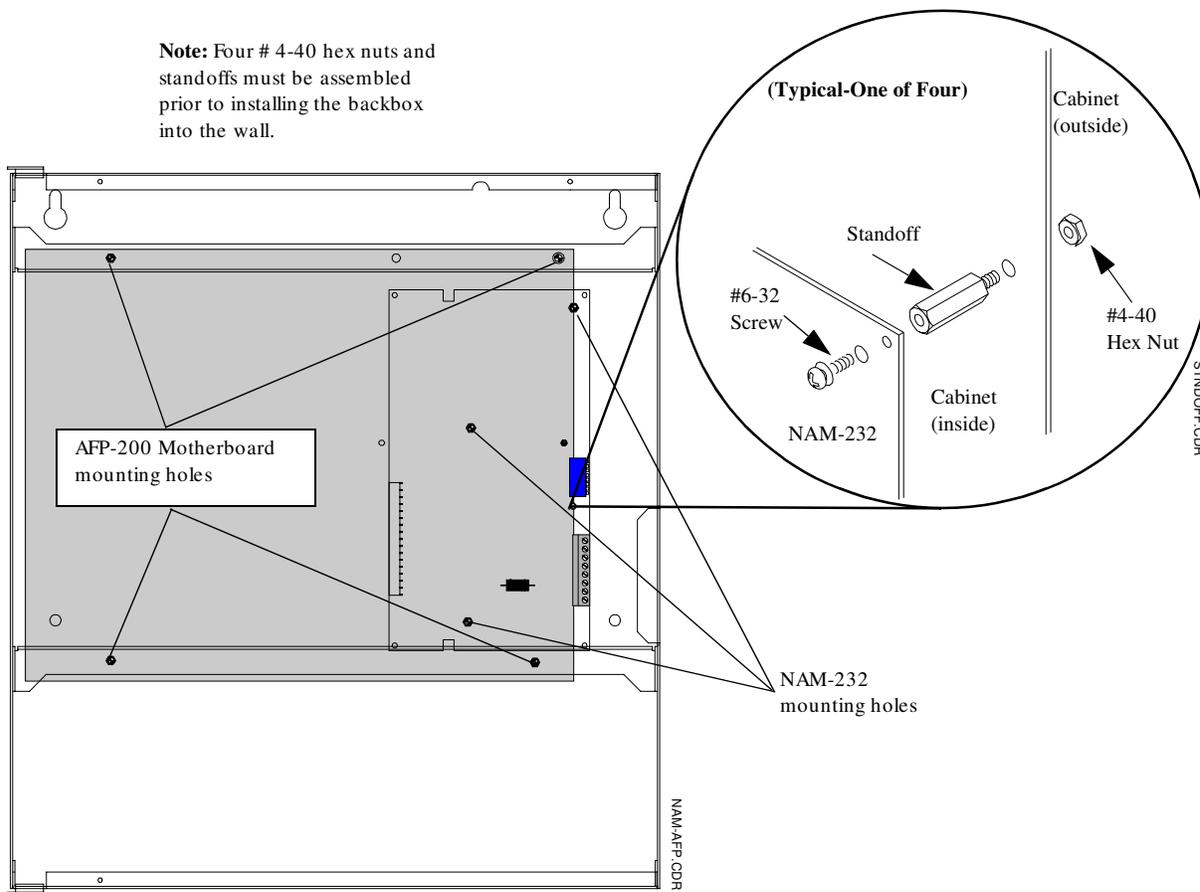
Removing the AFP-200 Motherboard to Mount the NAM-232
